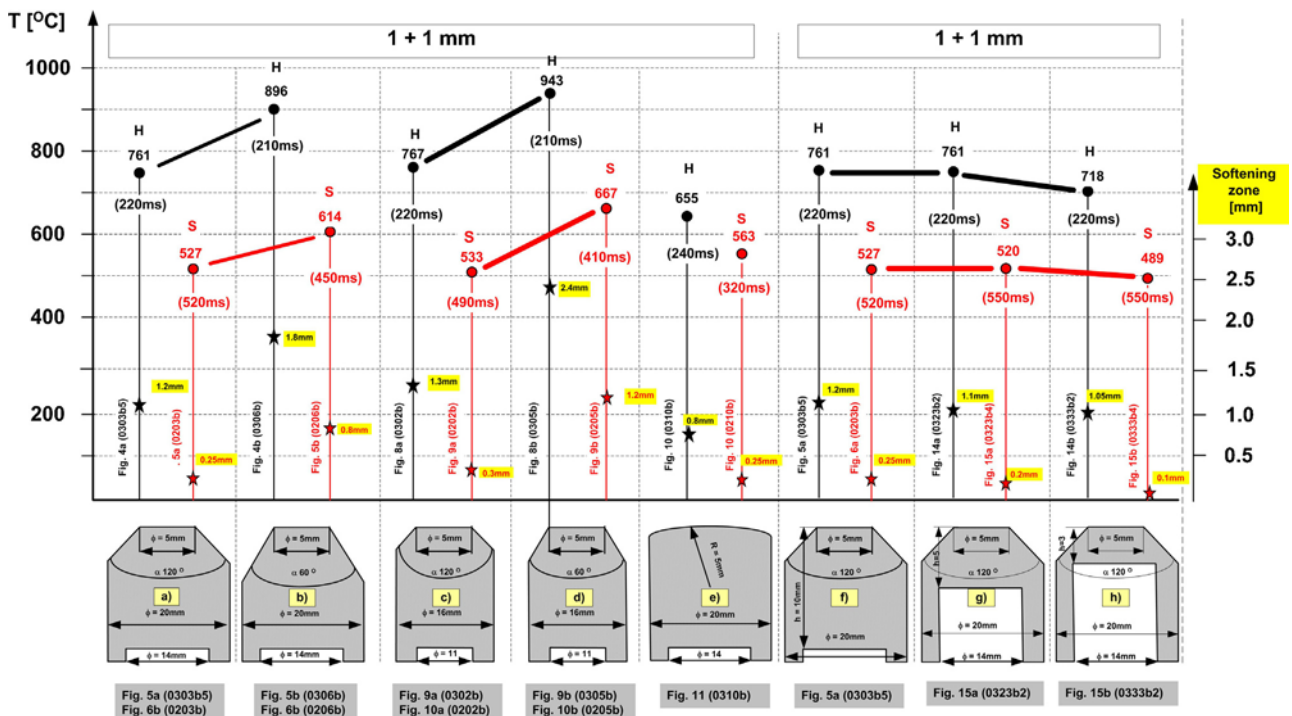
Shapes of electrode tips, welding parameters and characteristic quantities obtained in computational model (H – hard welding parameters, S – soft welding parameters).
